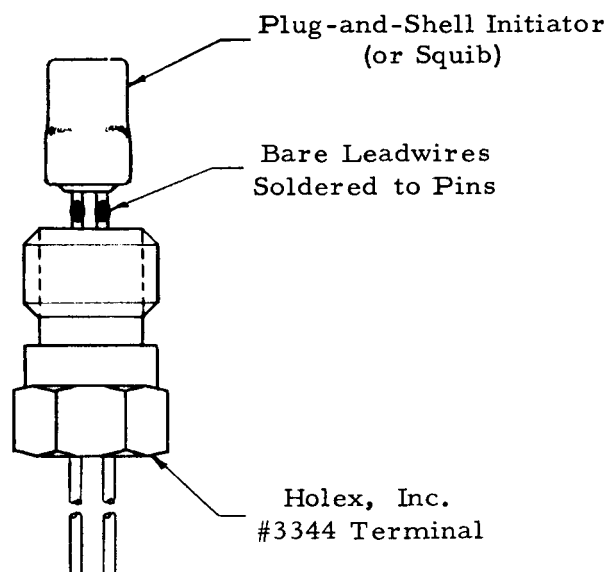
Method of Mounting a Plug-and-Shell Initiator for Closed Bomb Testing
